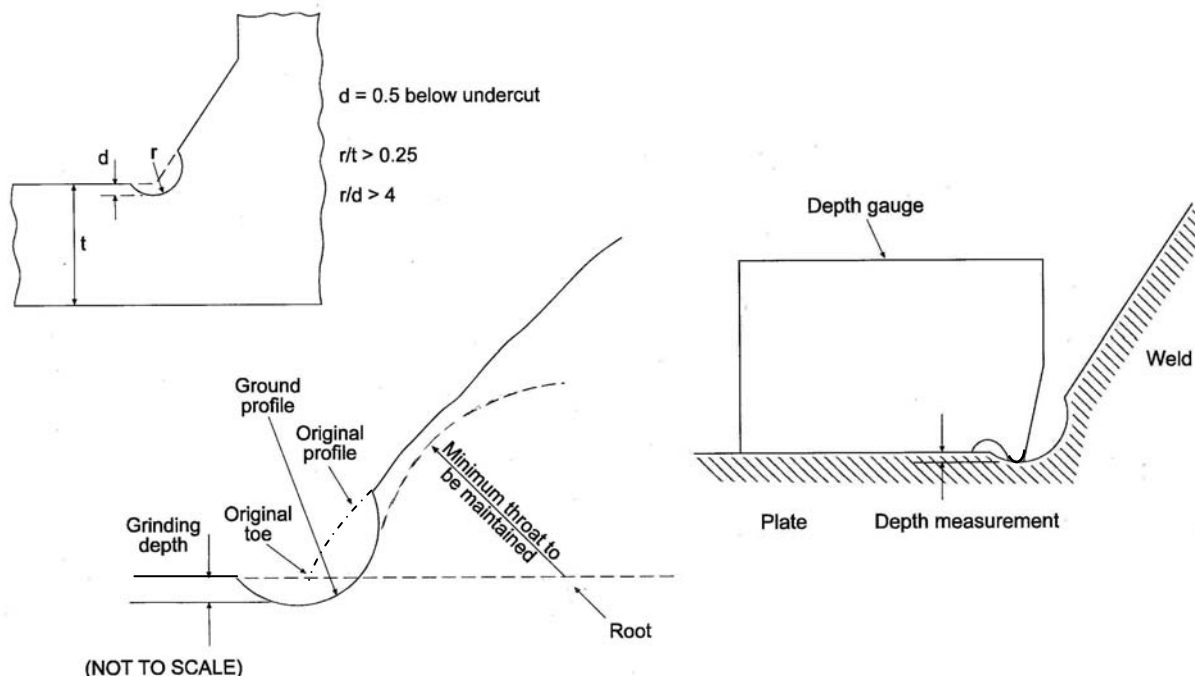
Details of burr ground weld toe geometry.
